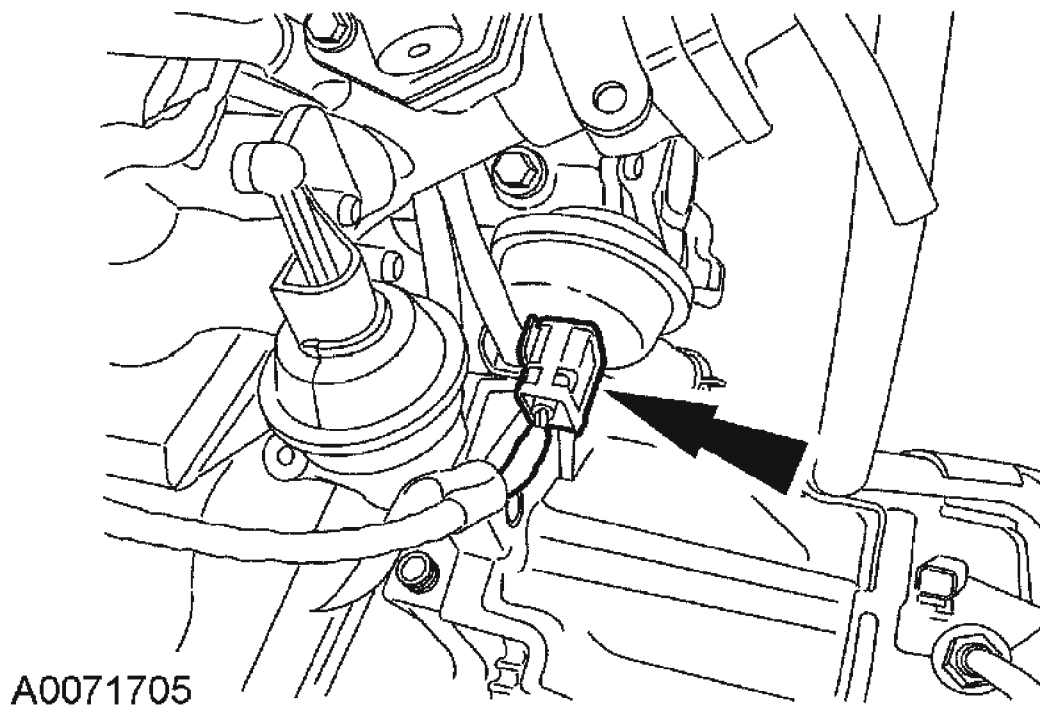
Disconnecting Intake Manifold Runner Control Actuator Electrical Connector
